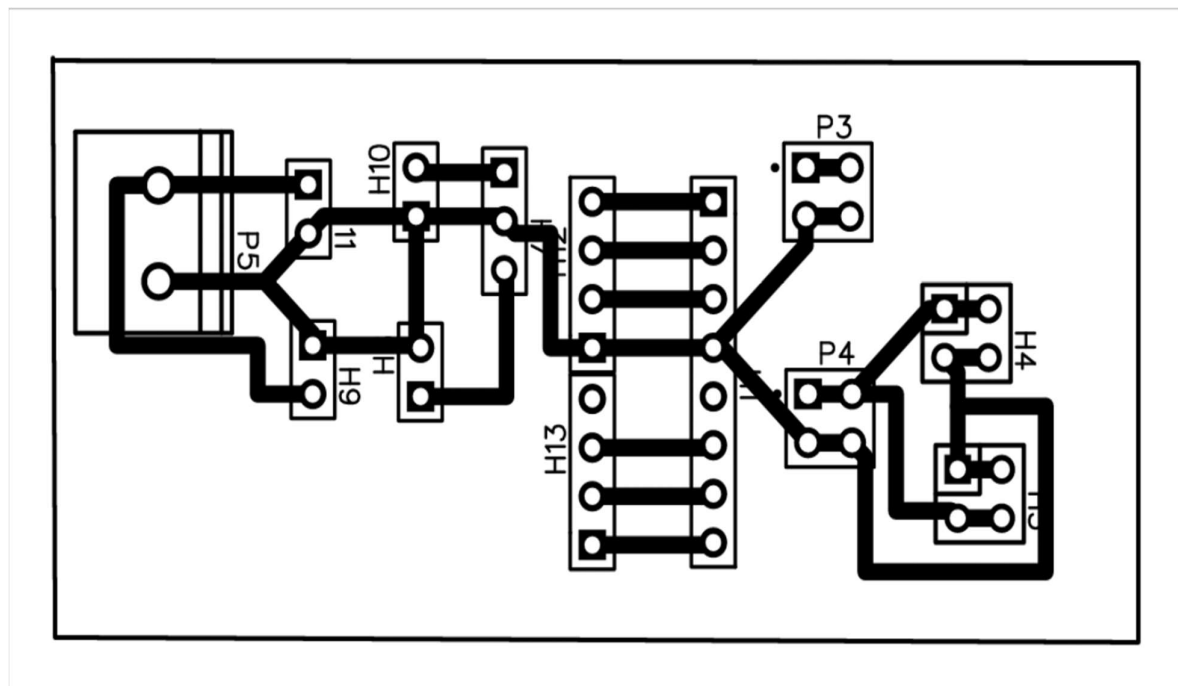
GPS and HMC 5883L circuit PCB layout
